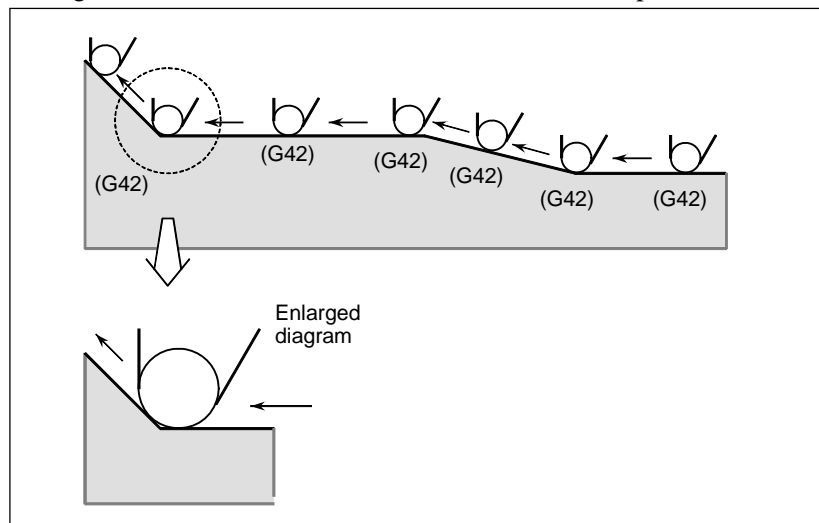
(c) Tool movement when the workpiece position does not change
